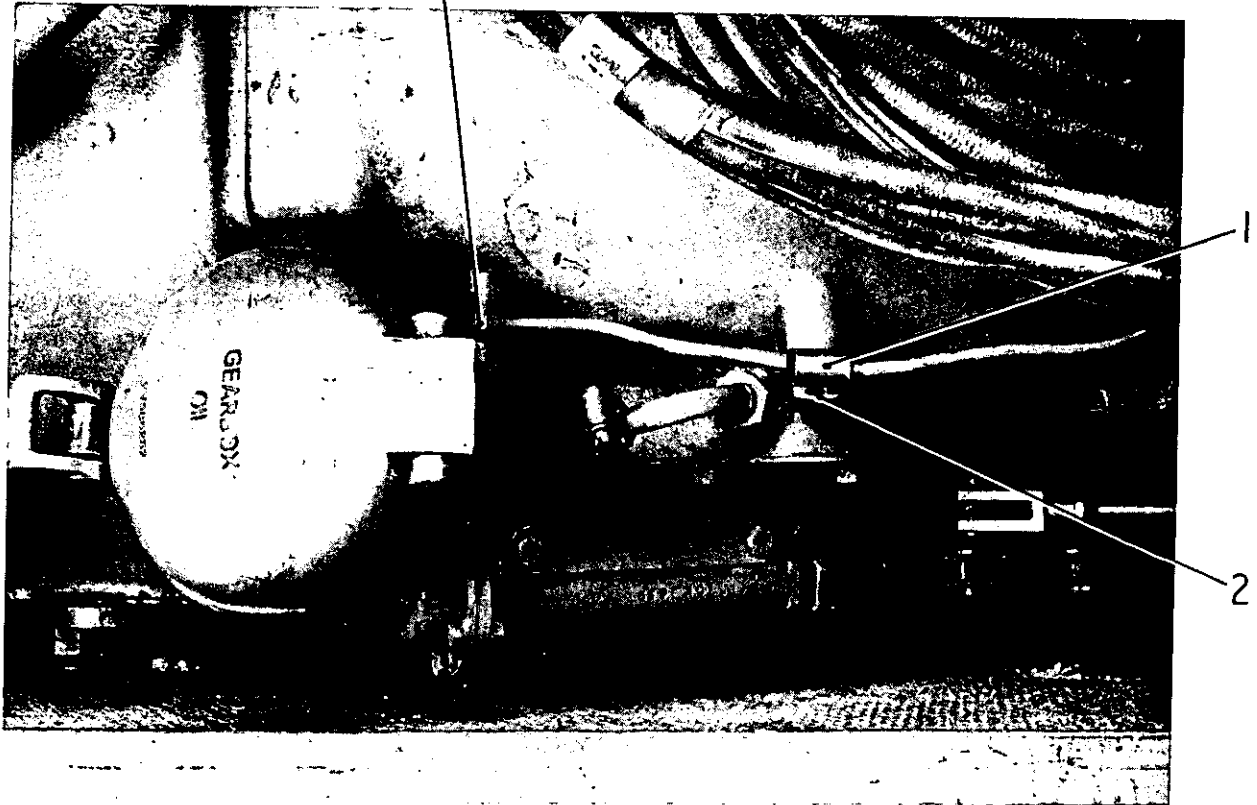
View of clip on gearbox (FV 432, Mk 2 illustrated)
